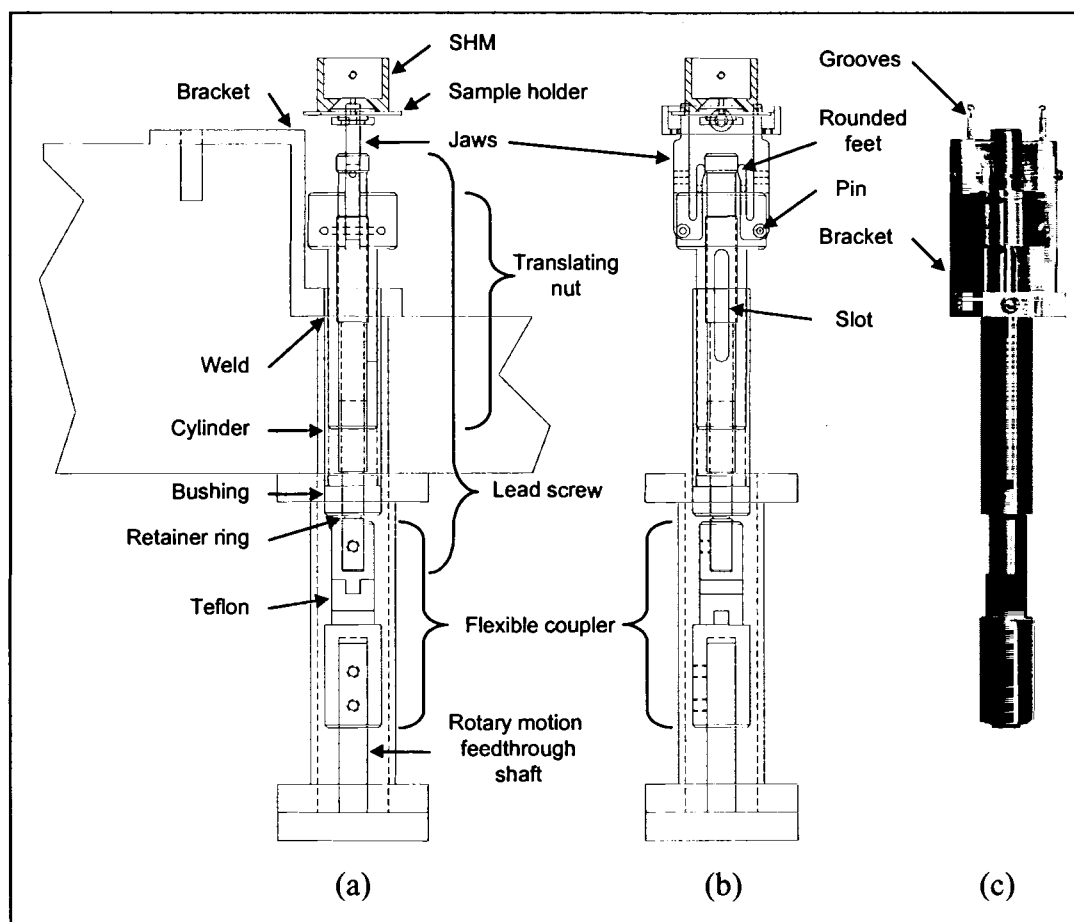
"Jake". (a) Side view schematic mounted in flange. (b) Front view schematic. (c) Front view photograph.
